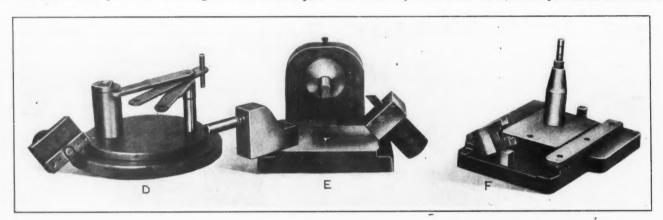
(D) Bolt-hole Flange Forming Die; (E) Die for removing Metal left between Saw-Cuts; (F) Curling Die which forms Stops D, Fig. 4
